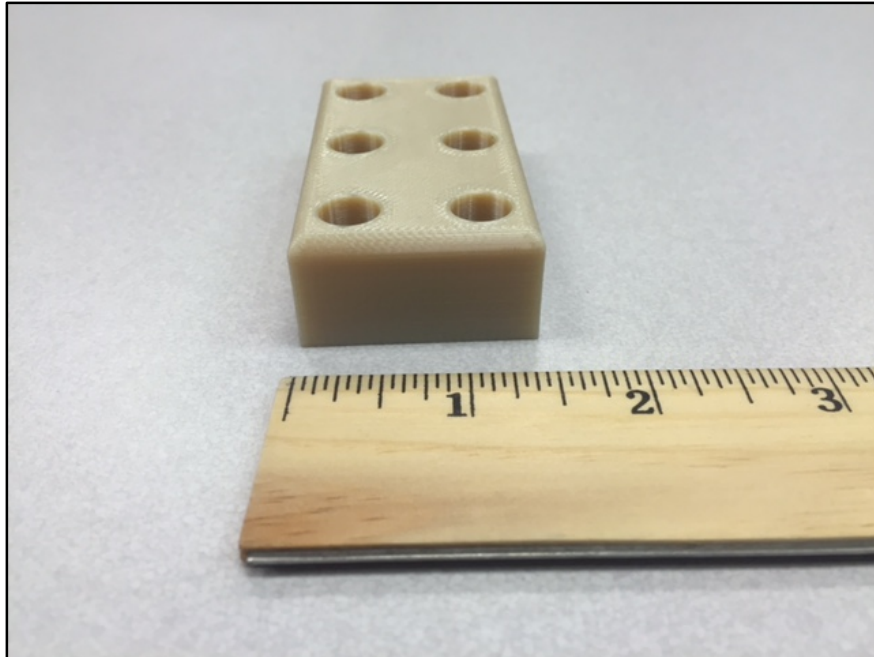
End View, 3D Printed C-130J Aft Cargo Door Rub Strip
